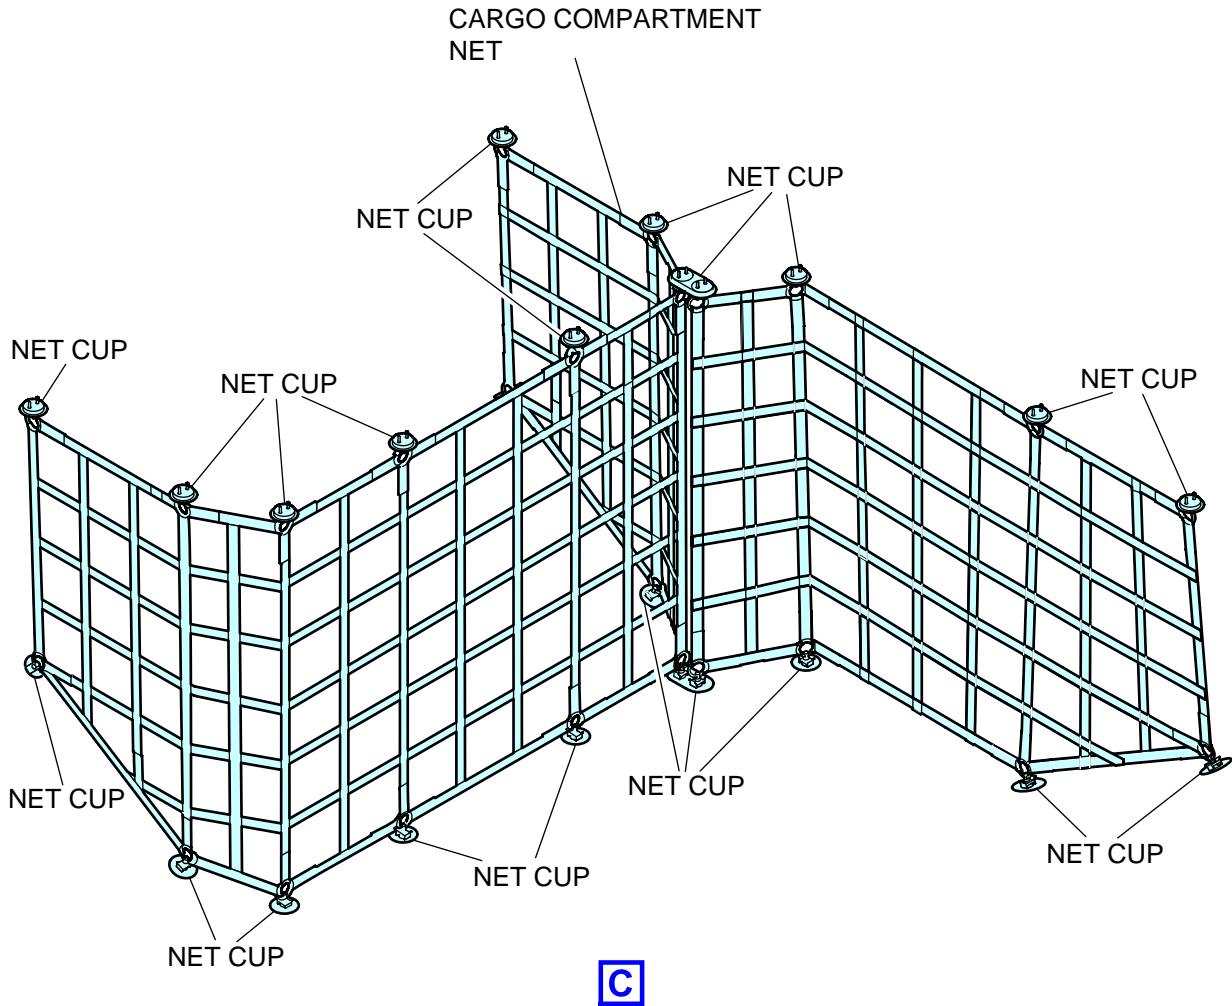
Aircraft cargo side view - (Sheet 2 of 3)
